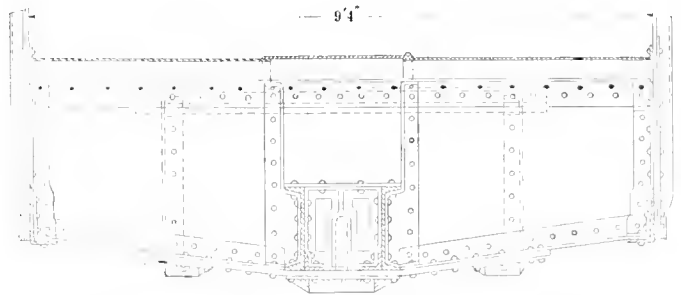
BODY BOLSTER ON LAST LOT OF HOPPERS (N-10 AND N-10A). SEE FIG. 16 FOR PLAN AND SECTION.
